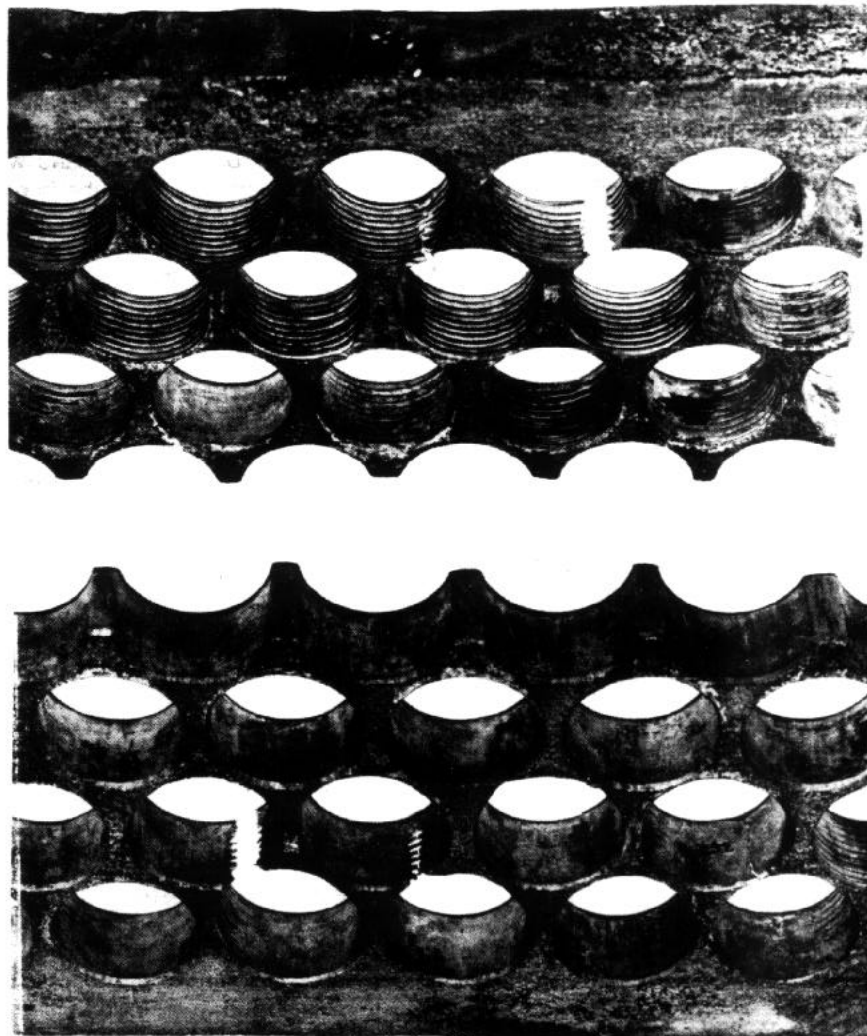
Grooved tube support sheet; top: anterior view; bottom: posterior view
